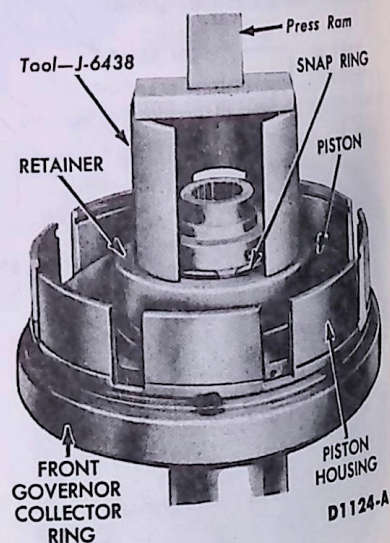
High-Range Clutch Piston Return Spring Retainer Installation
